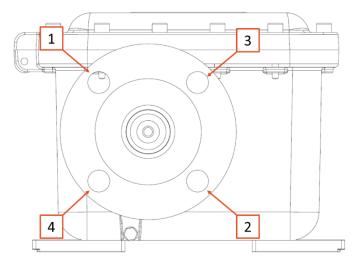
Front view of lap-joint flange, hub and bolt holes. Tighten bolts in steps in order 1-2-3-4 to ensure even compression of the gasket
